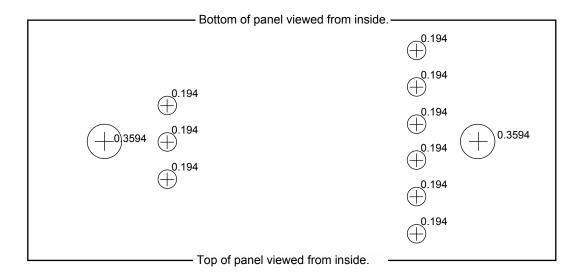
RA20A301 Front Panel drill pattern. Note this is inside view and upside down from the outside panel view. The prototype was fabricated from a single sheet of aluminum so the bend and drill markings are for inside operations.
